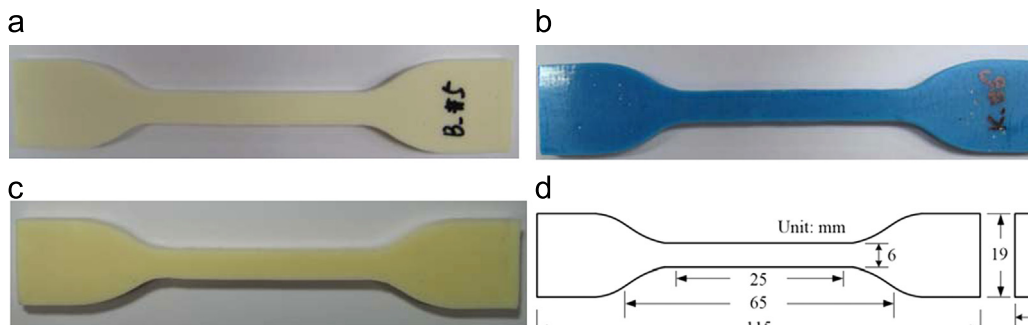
Dimension of ASTM D638 and fabricated specimens. (a) BOND-IT 7080 (adhesive 'B'), (b) KFR-730 (adhesive 'K'), (c) MOS 8 (adhesive 'M'), (d) dimension.
